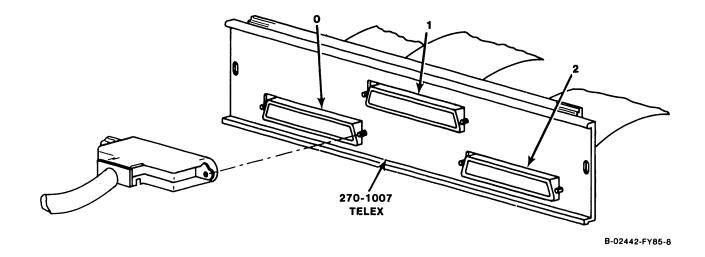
270-1007 Telex Tape Drive Connector Assembly
